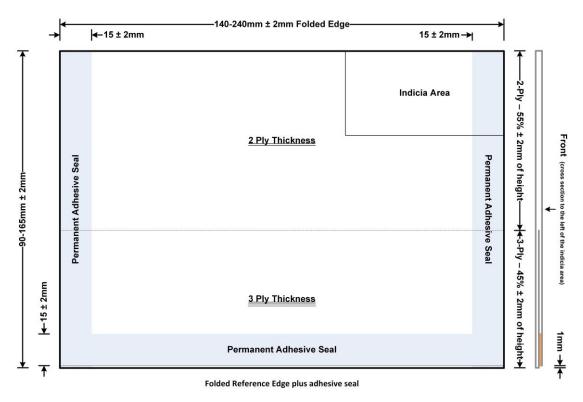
Standard One-Piece Letter Mailer - Spot Weld Requirements (Not to Scale)
